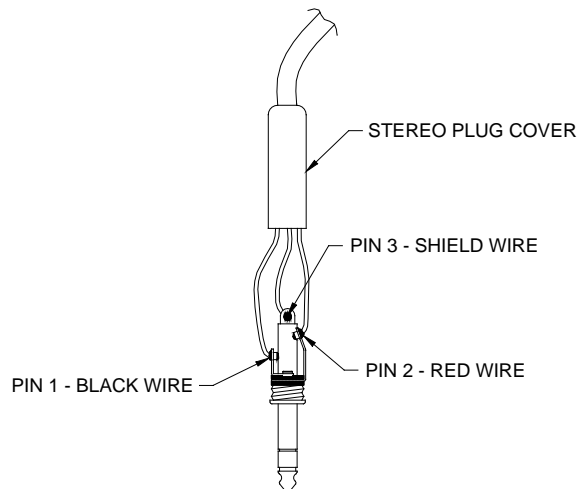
1/4-inch Stereo Plug Wiring Diagram
